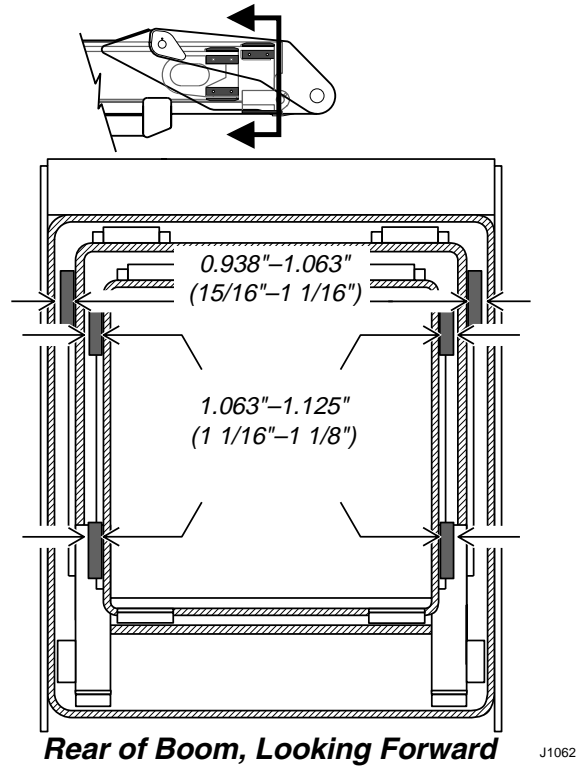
Clearances Between Boom Sections – Rear of 3-Section Boom
